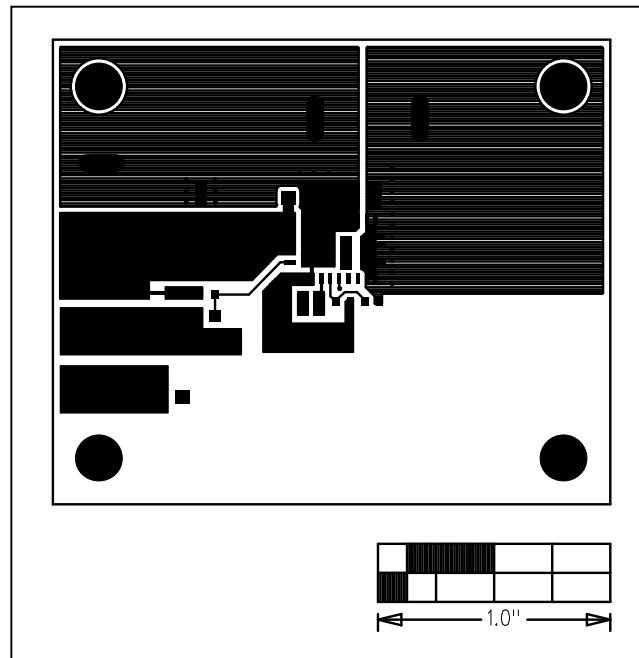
MAXM17514 EV Kit PCB Layout—Component Side
